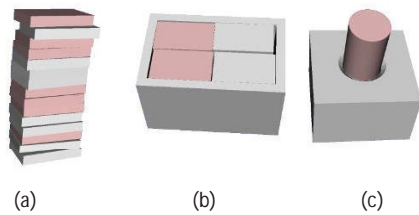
Assembly tasks: a) Pile of boxes b) Packing box c) Peg & hole
